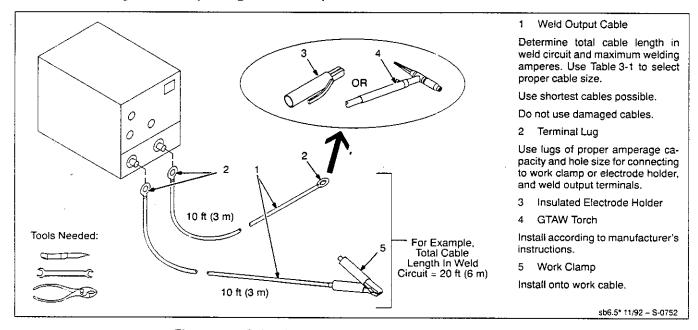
Selecting And Preparing Weld Output Cables
